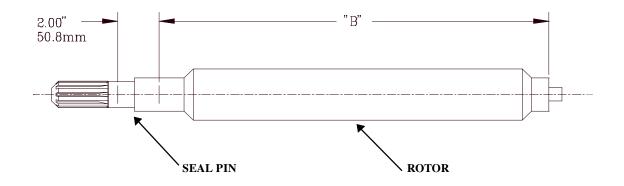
Seal Pin Locations For Rotors With Internal Bearings
